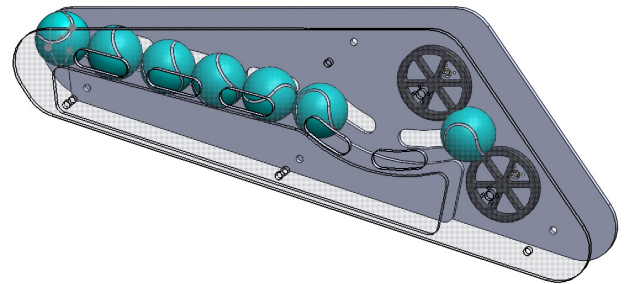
Mechanism CAD draft, not yet shrunk for fewer ball holdback.
